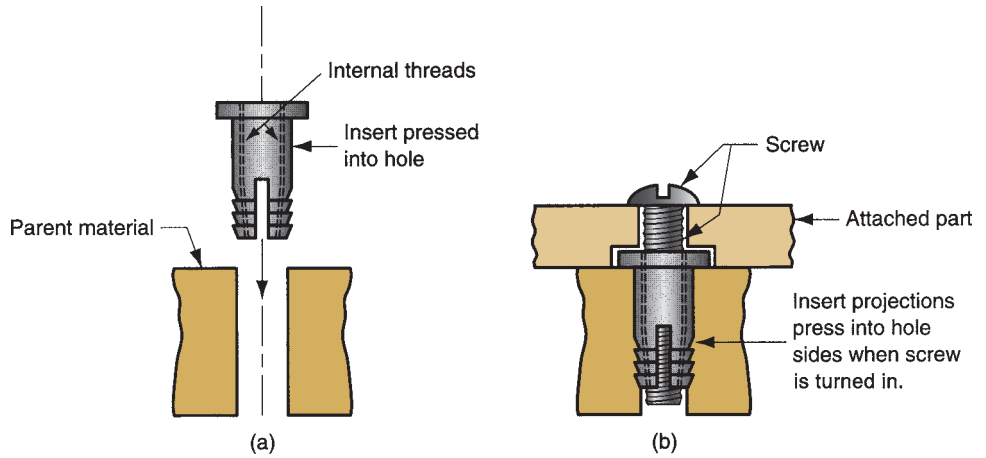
Screw thread inserts: (a) before insertion, and (b) after insertion into hole and screw is turned into the insert.
